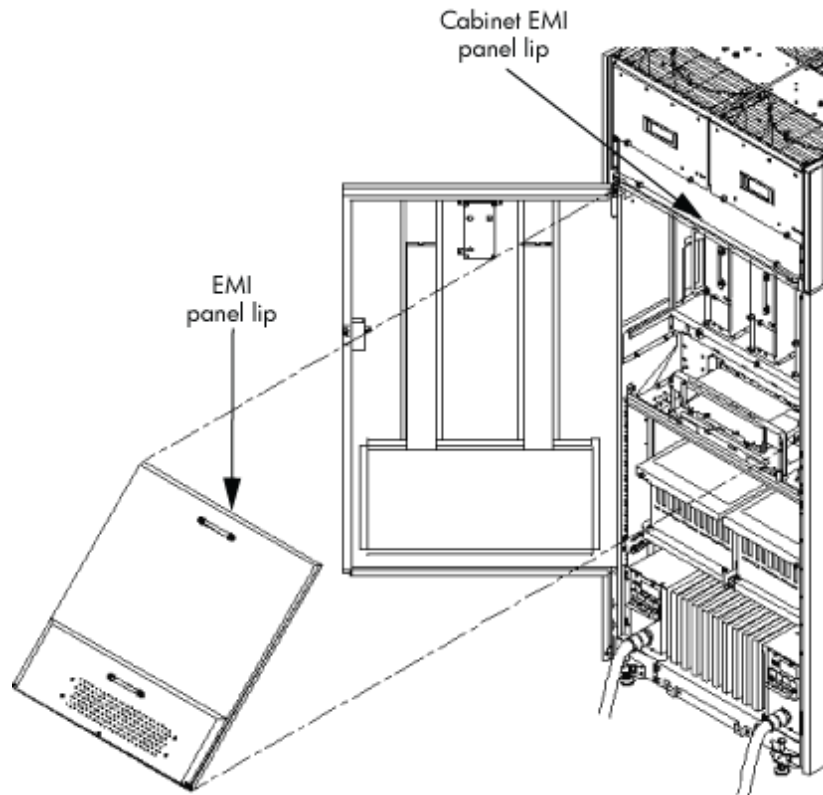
Front EMI Panel Flange and Cabinet Holes
